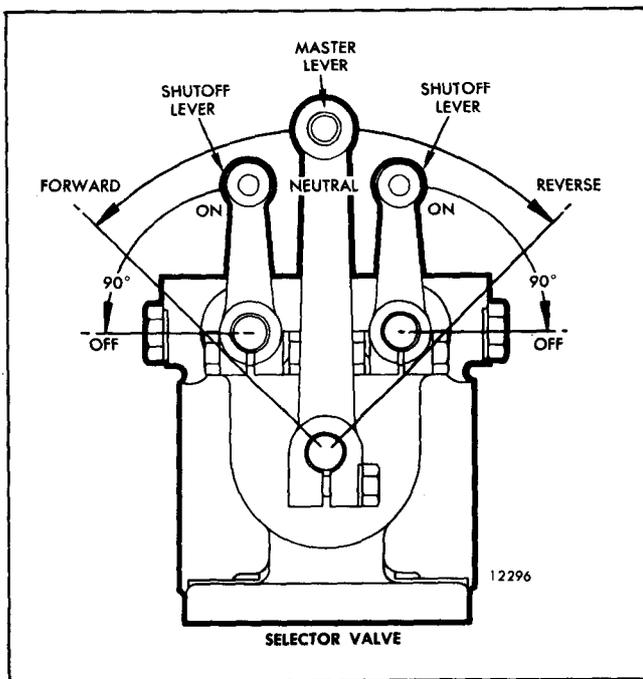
Operation of Selector Valve on Multiple Engine Units
